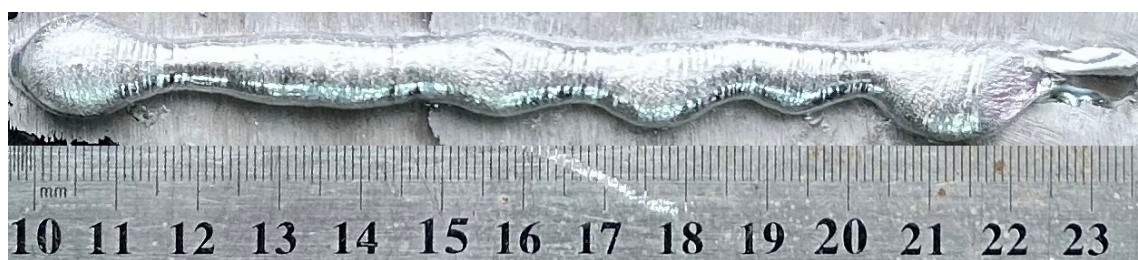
External appearance of the welding bead produced in the following mode:
